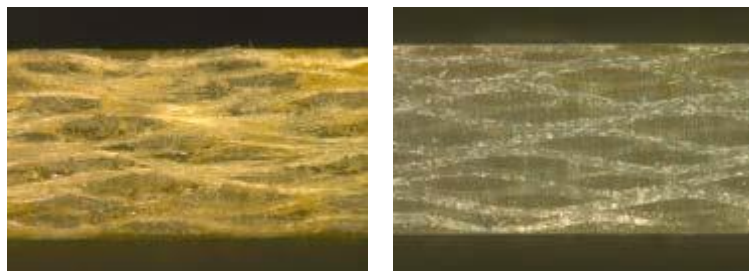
Cut edges of milled (left) and laser-cut (right) FR4 material. Clearly visible: After the milling process, the edge shows open structures with chipping; laser cutting produces a closed surface.
